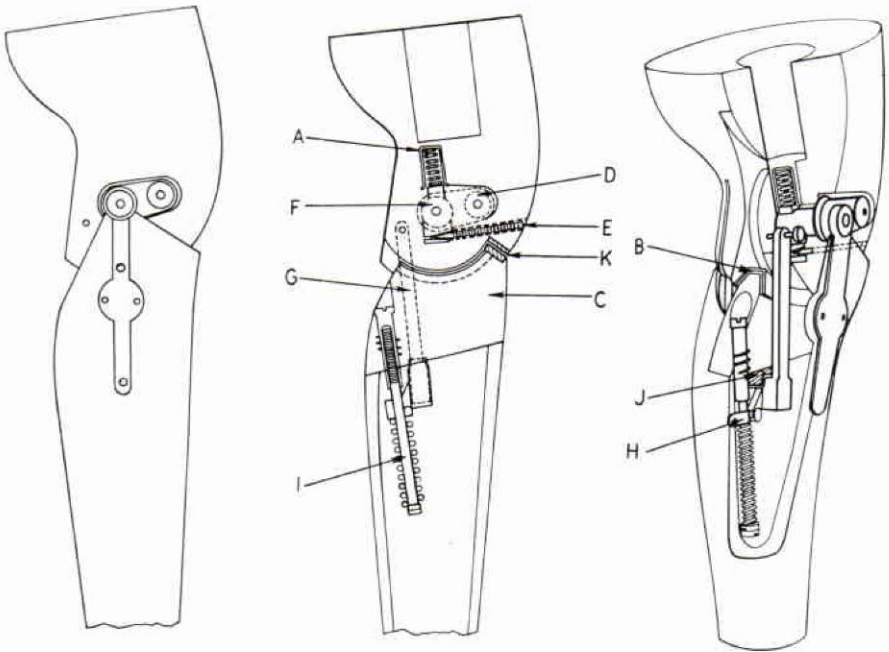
Schematic Drawings of the Otto Bock Safety Knee.
